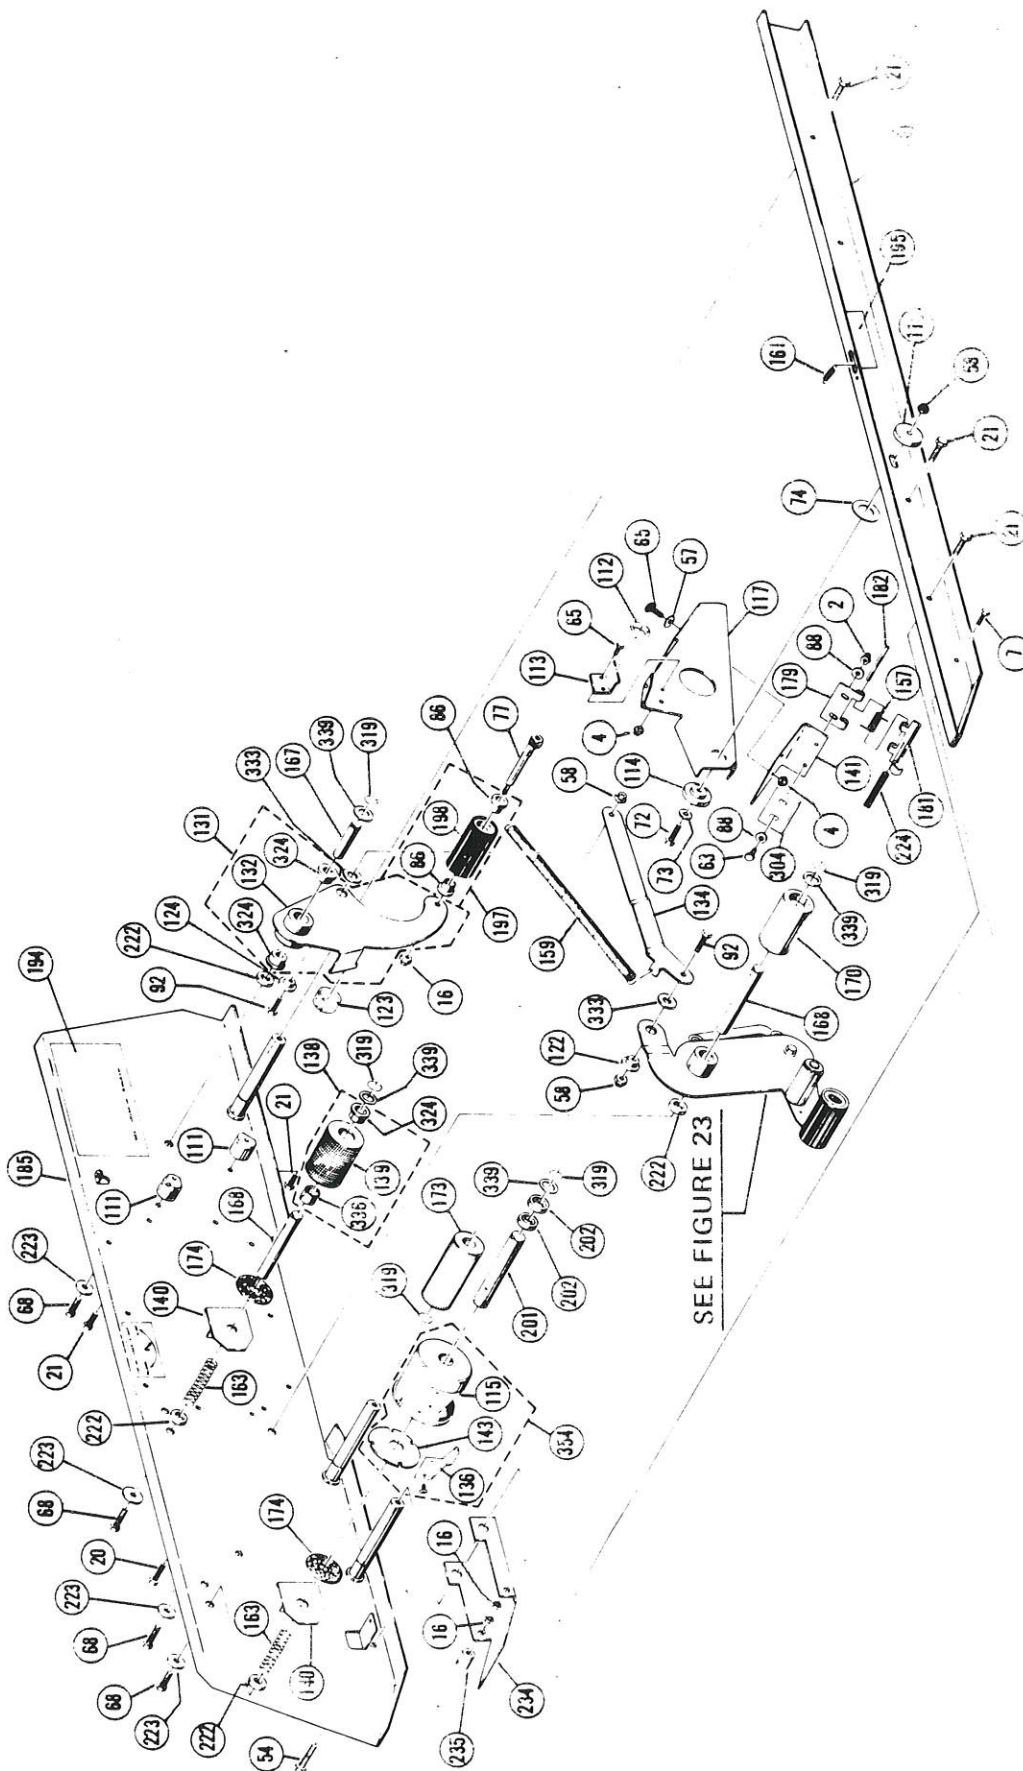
UPPER TAPING HEAD ASSEMBLY
